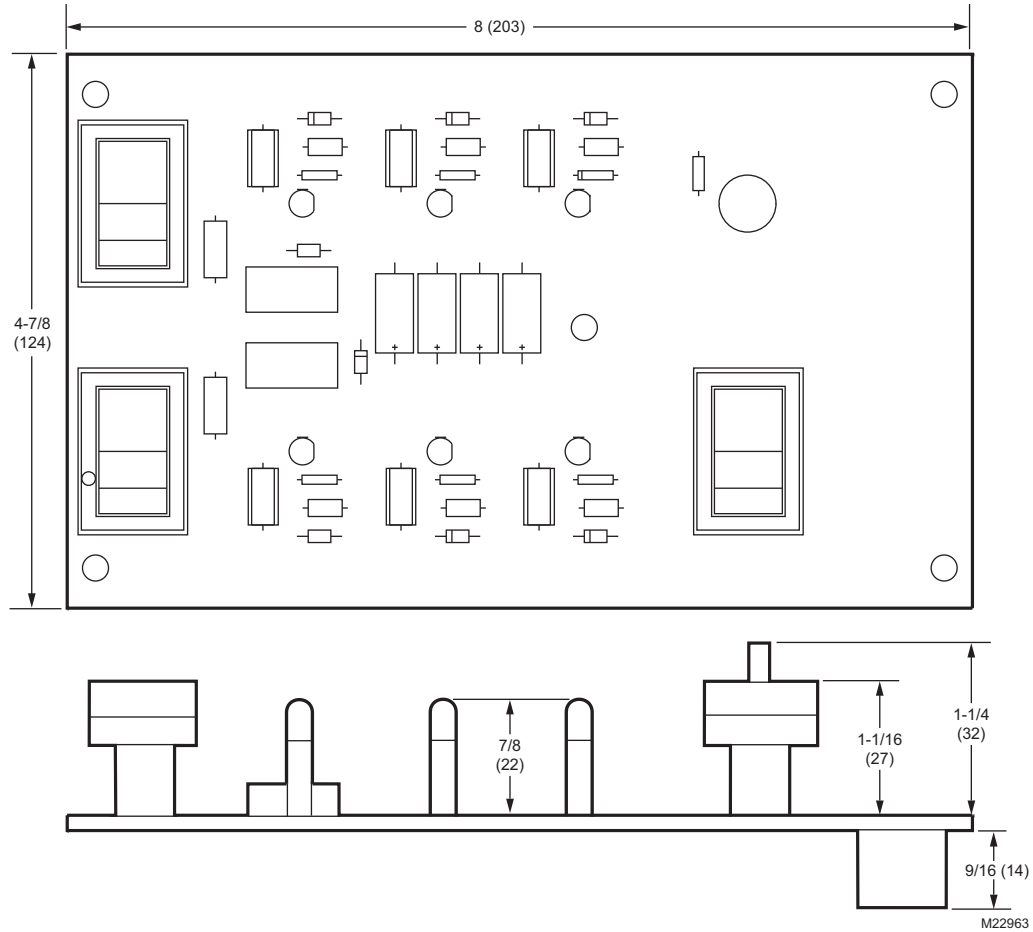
Integrated Burner Control Subpanel Switch Assembly dimensions in in. (mm).
